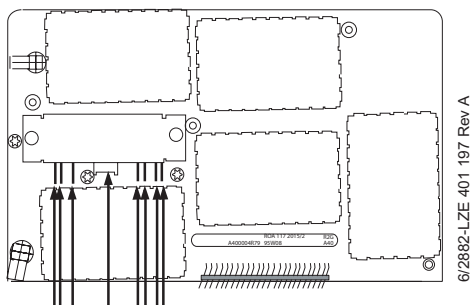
Locating the seven pins and the small metallic tongue to be cut off.
